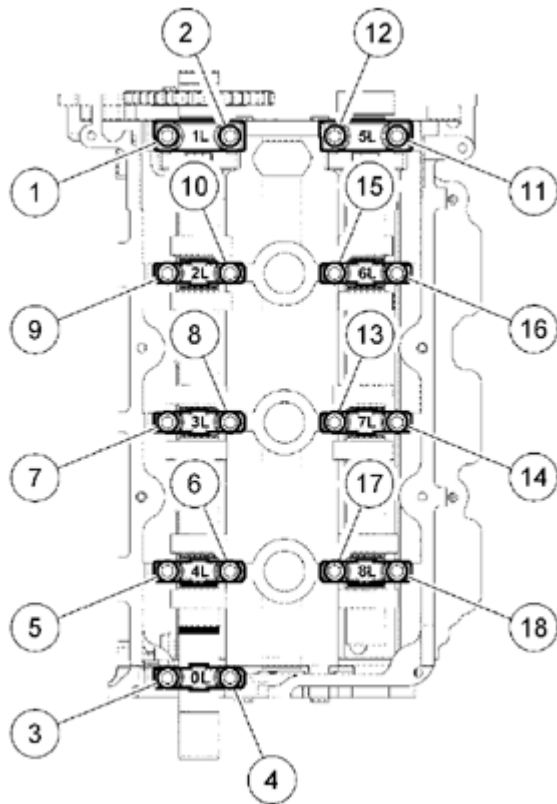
Locating Cylinder Head Camshaft Bearing Caps
